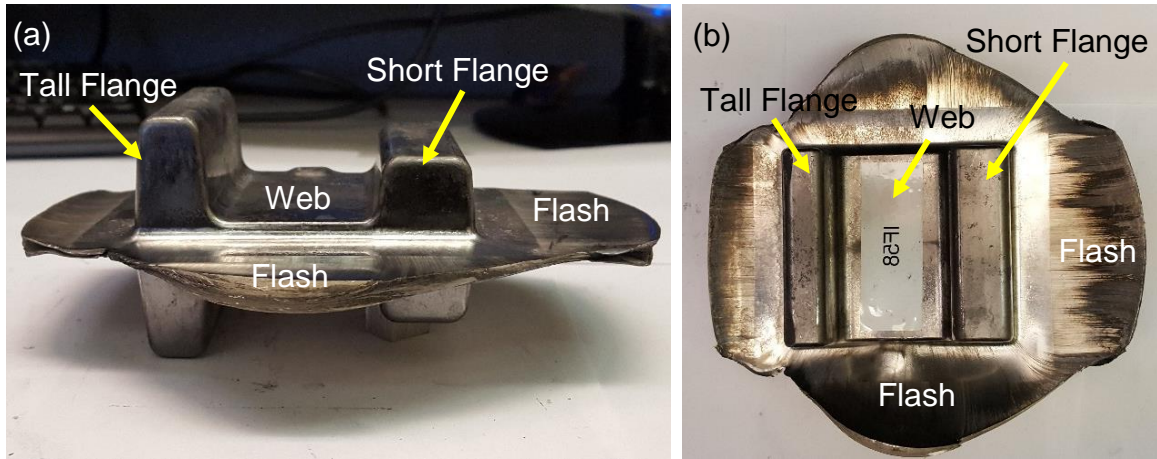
Photographs of a finished forging processed at 375°C and starting with extruded AZ31B.
